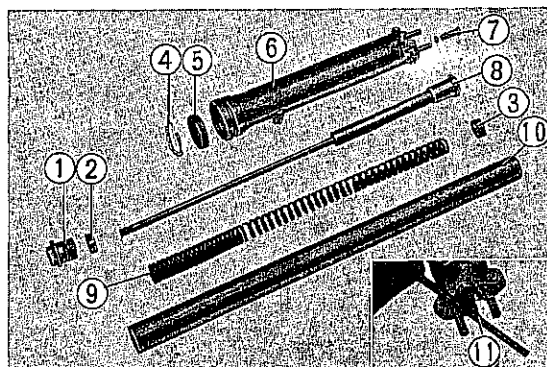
① Front fork bolt ⑦ 8mm bolt
